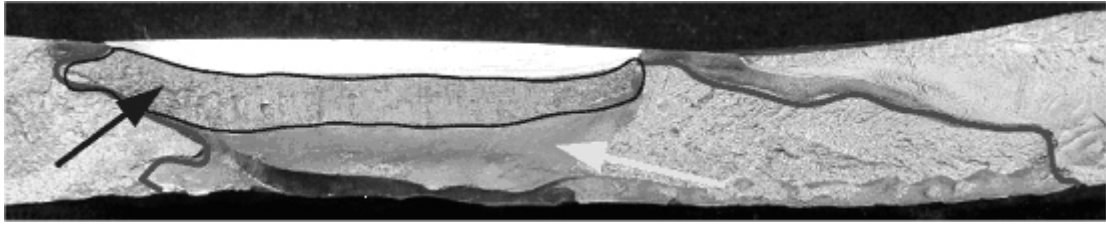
Fracture face of the specimen with the notch at the weld centre-line
